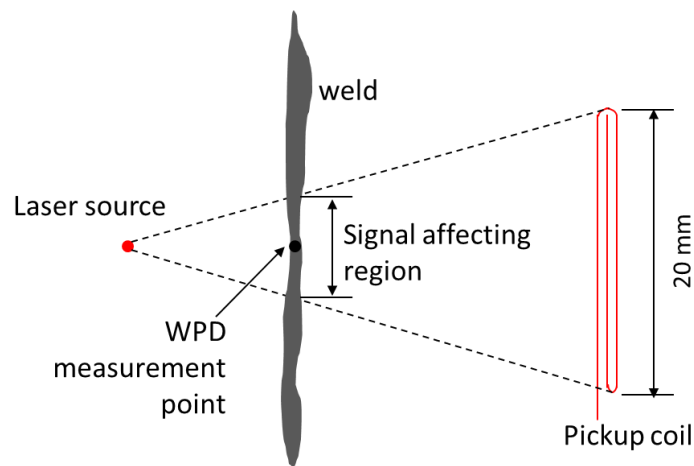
Layout of laser and EMAT relative to weld seam
